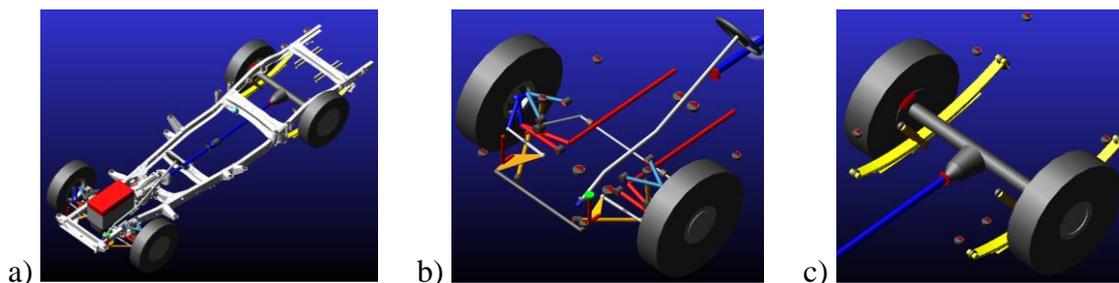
Vehicle in ADAMS/CAR: a) Full-vehicle b) Front suspension and steering c) Rear suspension.
